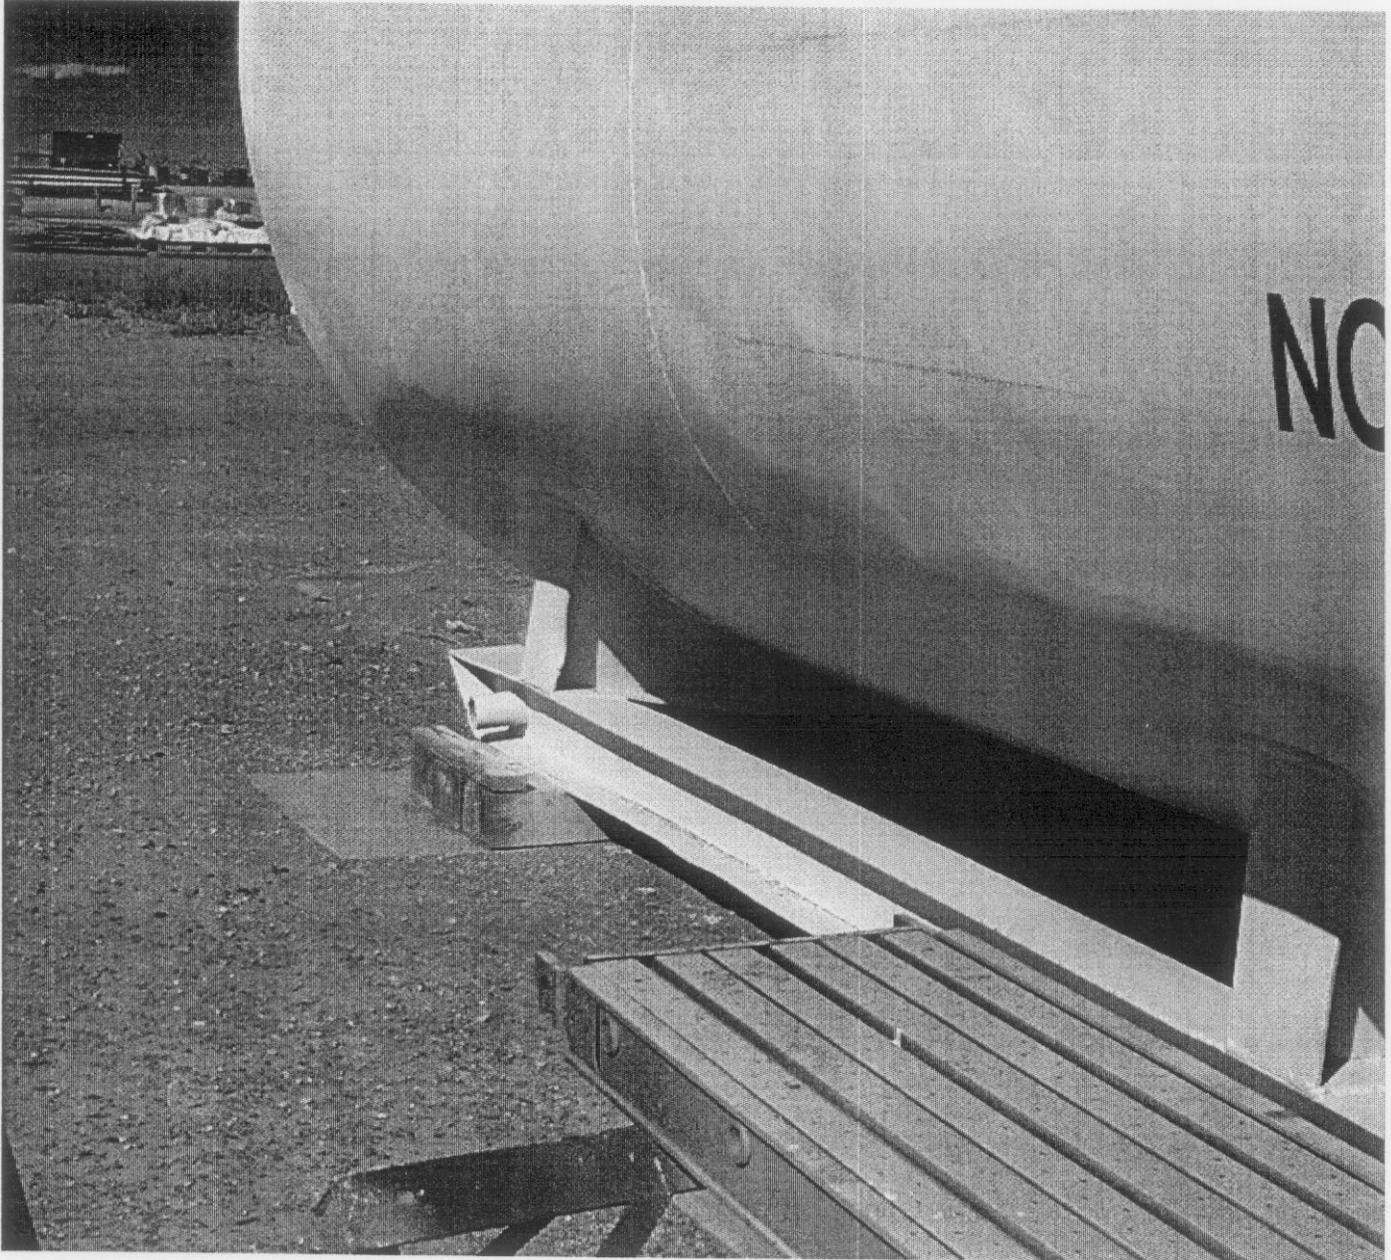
A close-up view a damaged weldment at the tank supports.
